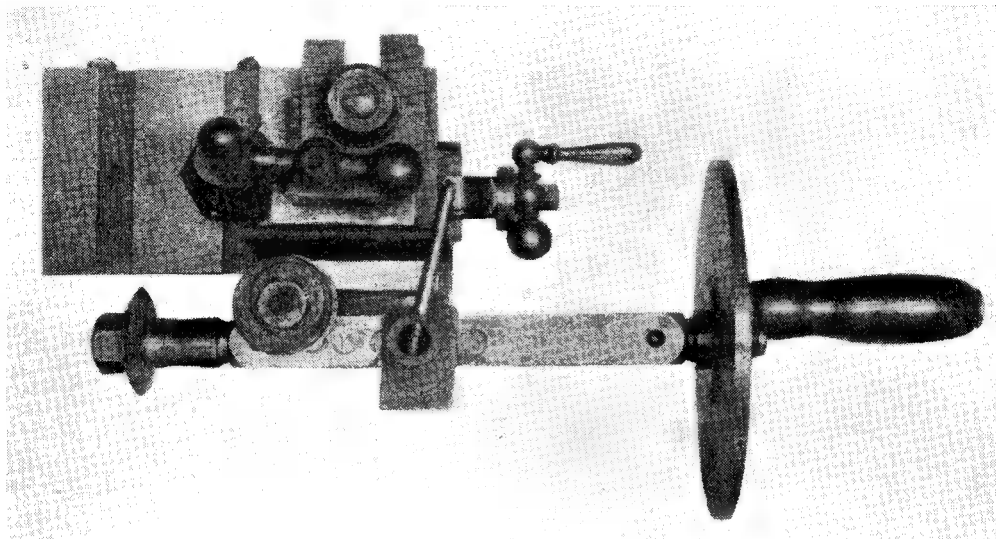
Plan photograph of the whole spindle setting on cross-slide saddle removed from lathe
